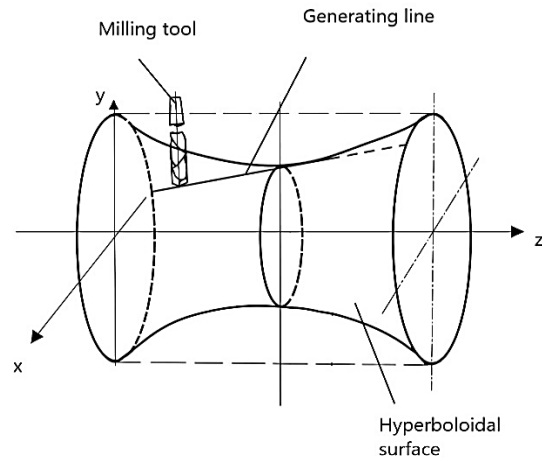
Generation of a hyperboloidal surface by rotating a rectilinear generator, for example, by using milling with an end mill (adapted from [3]).
